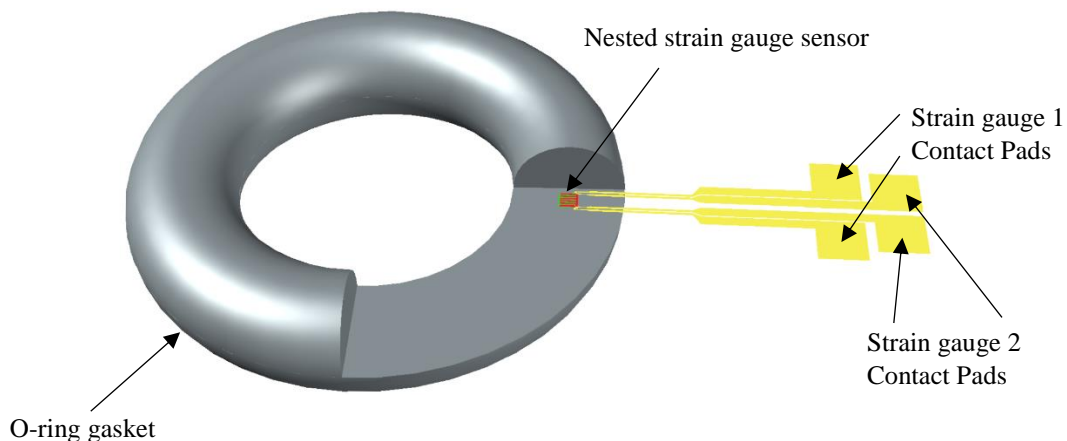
Polymer O-ring Gasket with Integrated Sensor
